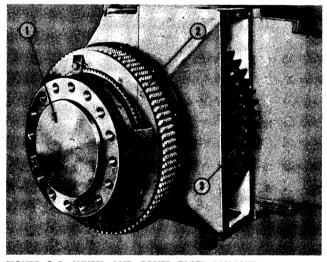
WHEEL AND COVER PLATE REMOVED 1. Axle. 2. Brake Assembly 3. Final Drive Gear
